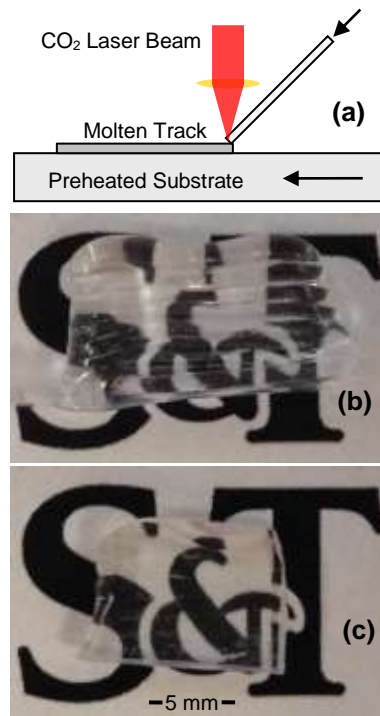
Illustration of wire-fed process and photographs of part (b) as deposited (c) after cutting and polishing.
